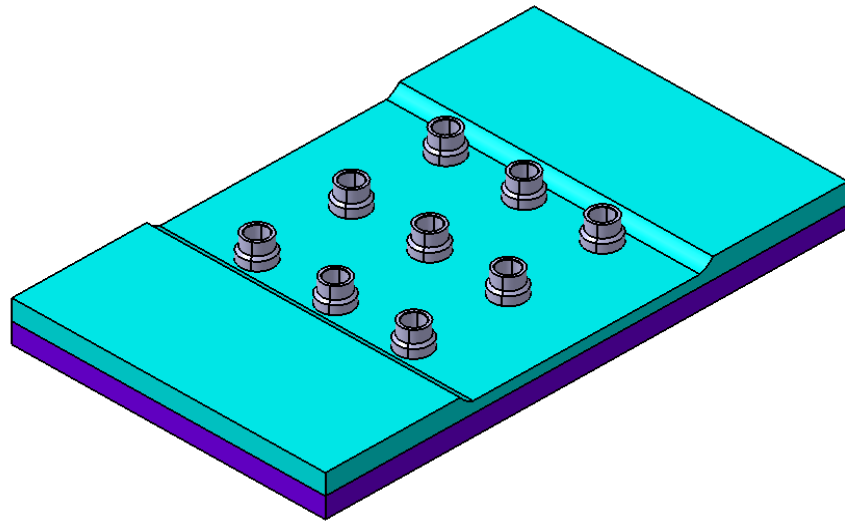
Stress Corrosion Bolt in Radius - Assembly - Isometric View
